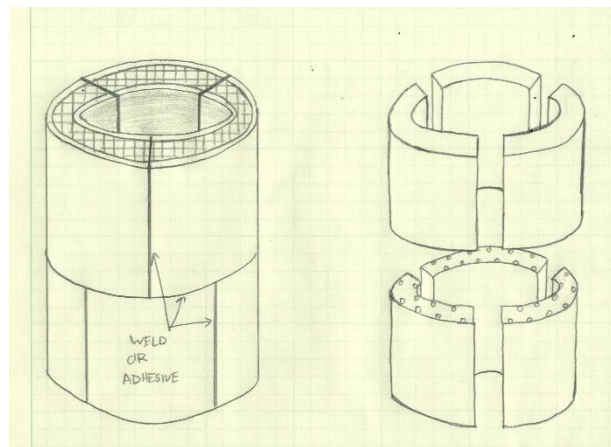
Dowel pin weld (9a) and dowel pin adhesive (9b)
